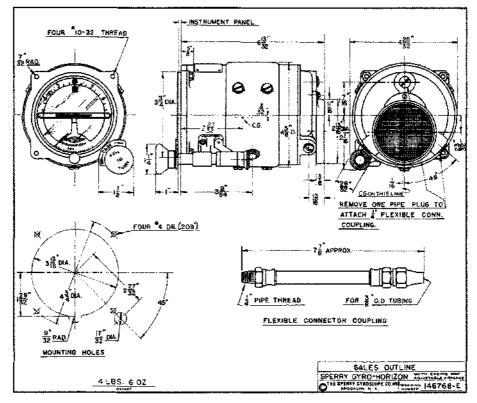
OUTLINE DRAWING OF THE GYRO-HORIZON WITH CAGING DEVICE
